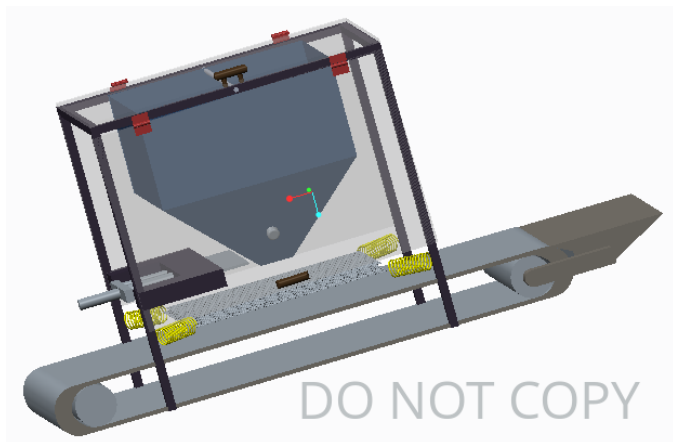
Angled Aerial view of design #5 to show all components incorporated.
